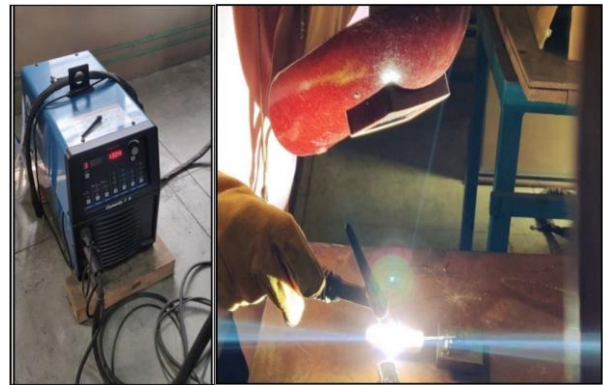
TIG Welding setup and melting of Ni-Cr-Mo pellets using TIG torch
